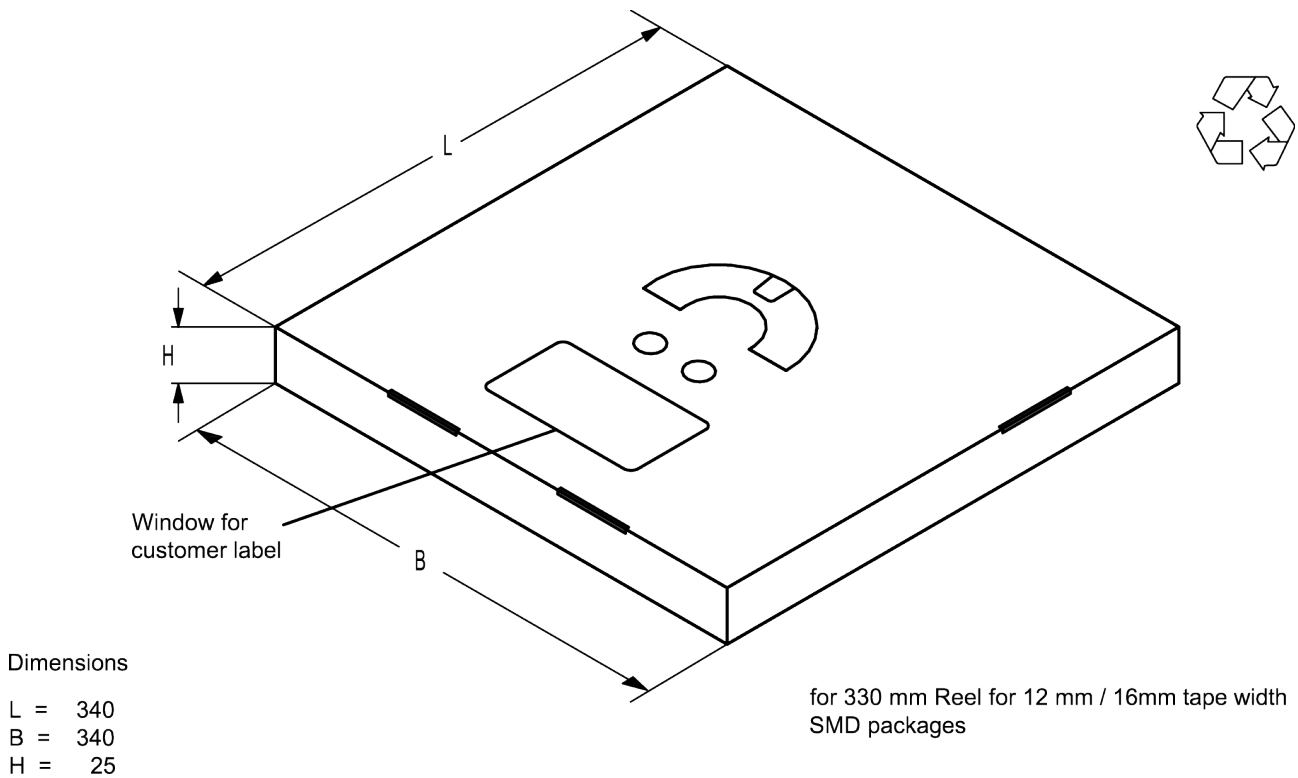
Drawing of folding box for reel with diameter of 330 mm.
